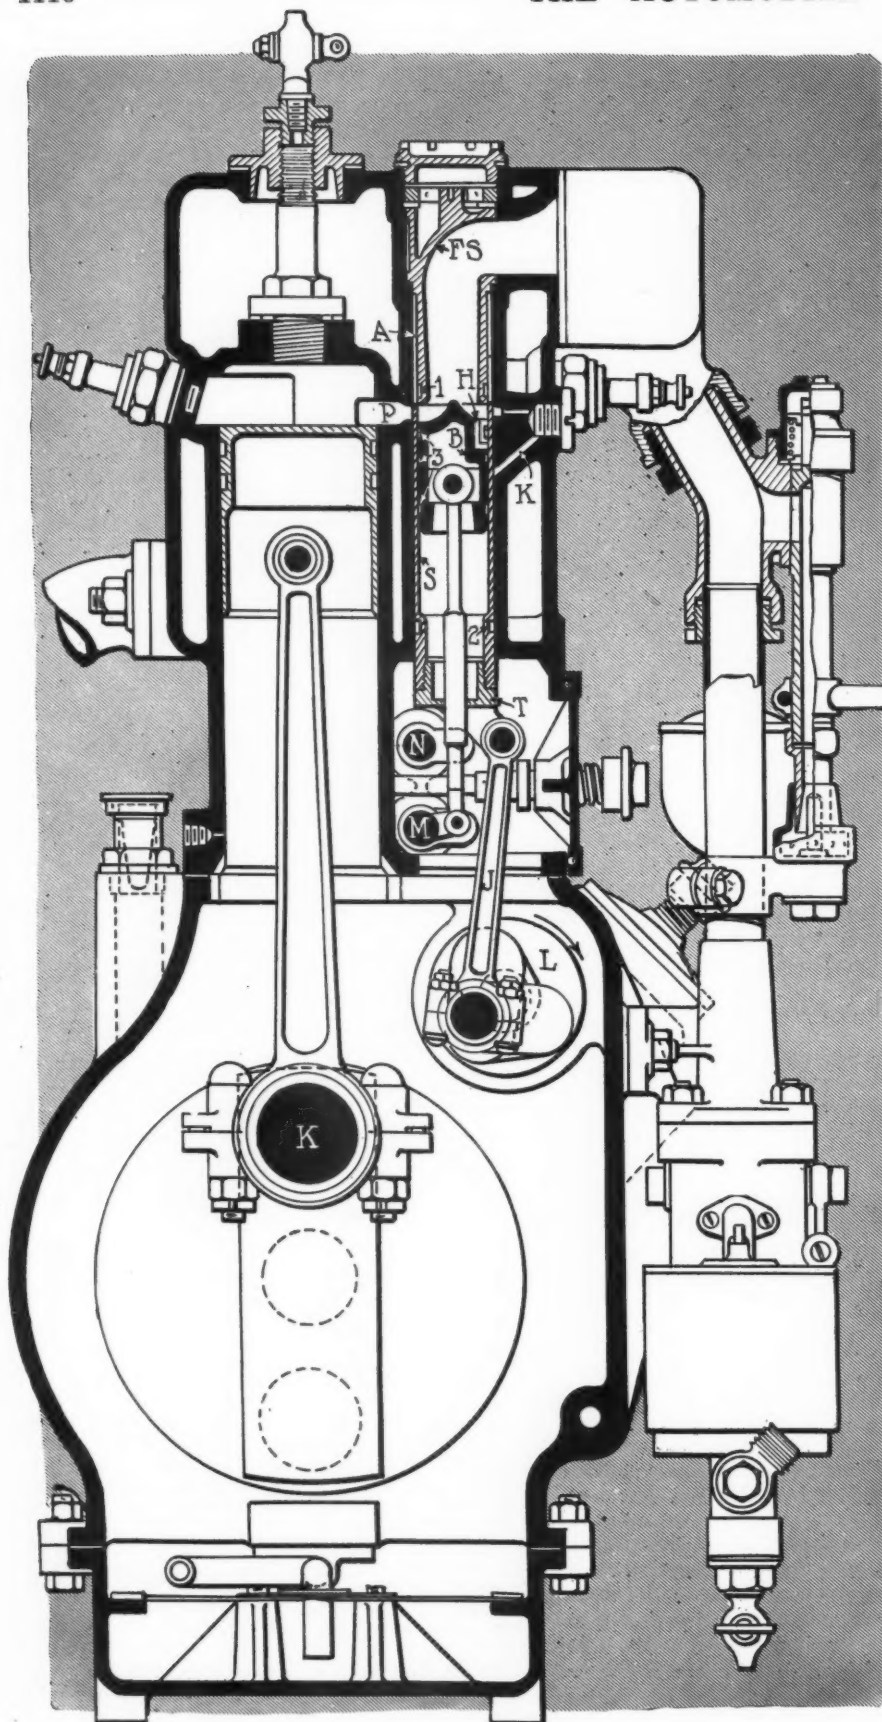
Vertical end section of Rockefeller sleeve valve motor, showing location of parts. There is reciprocating sleeve S to regulate the intake and a similar one to regulate the exhaust for each cylinder. These sleeves are operated from a layshaft L through a series of connecting-rods J. Above the sleeve is a fixed sleeve FS, which serves as a guide for the top of the reciprocating sleeve, leaving an annular space A, into which the reciprocating sleeve enters. Within the reciprocating sleeve S is a controlling abutment B manually operated from the steering wheel. This abutment regulates the size of the port, directs the flow of gases, and in the exhaust sleeve forms a by-pass in conjunction with passage K to eliminate the motor compression
